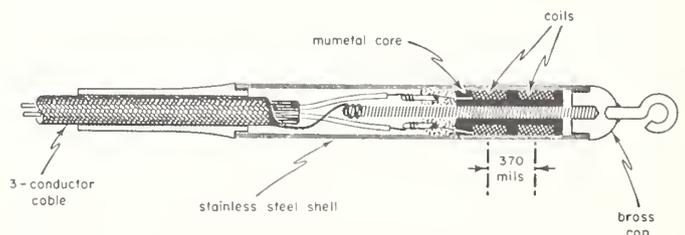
Search-coil assembly for the "Probolog" condenser-tube tester.
